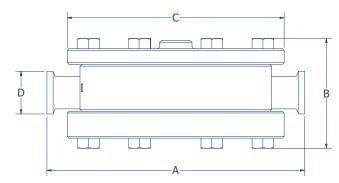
FDO Regulator with Active Damping - Dimensional Drawing
